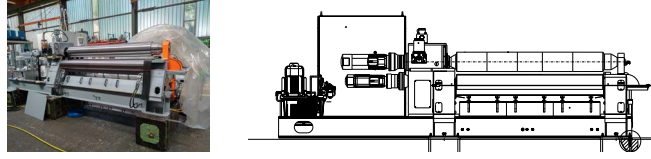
Test machine (HAEUSLER, VRM-2000x23) at HAEUSLER AG
